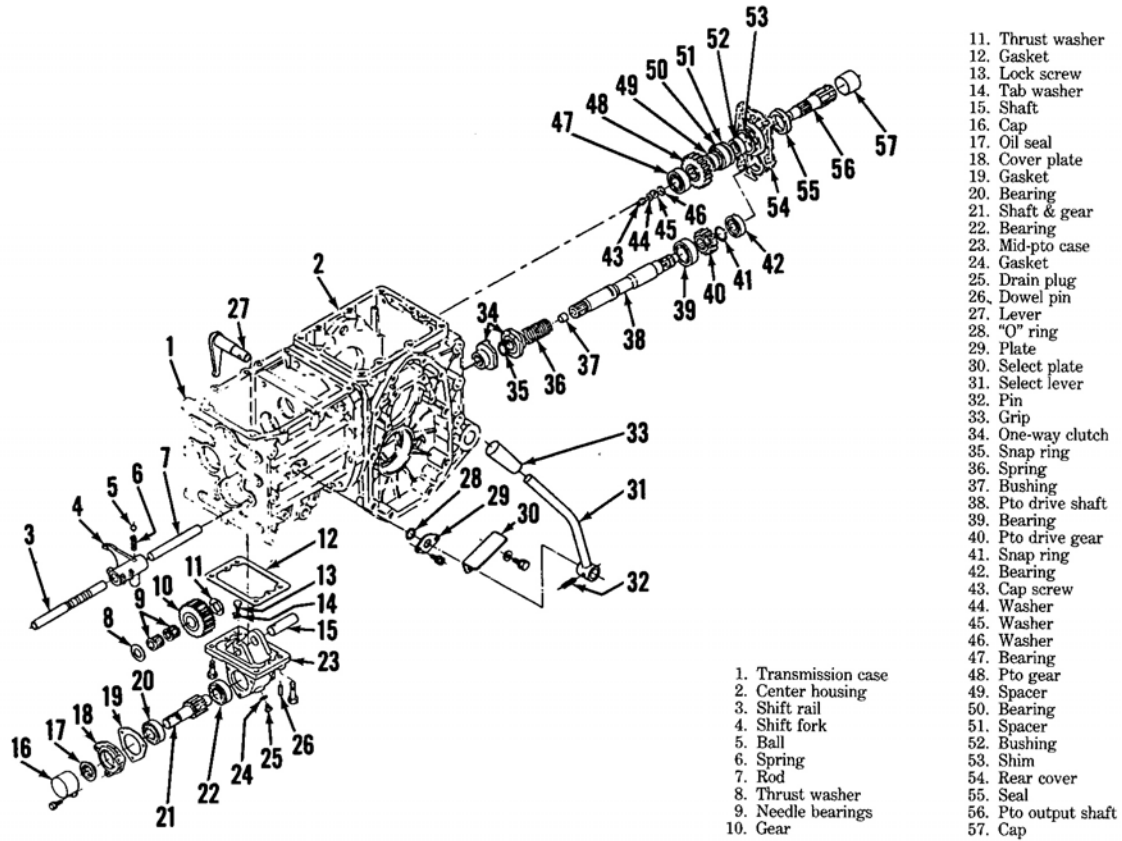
Exploded view of pto components used on Models B6100HST-D, B6100HST-E, B7100HST-D and B7100HST-E. Refer to text.
